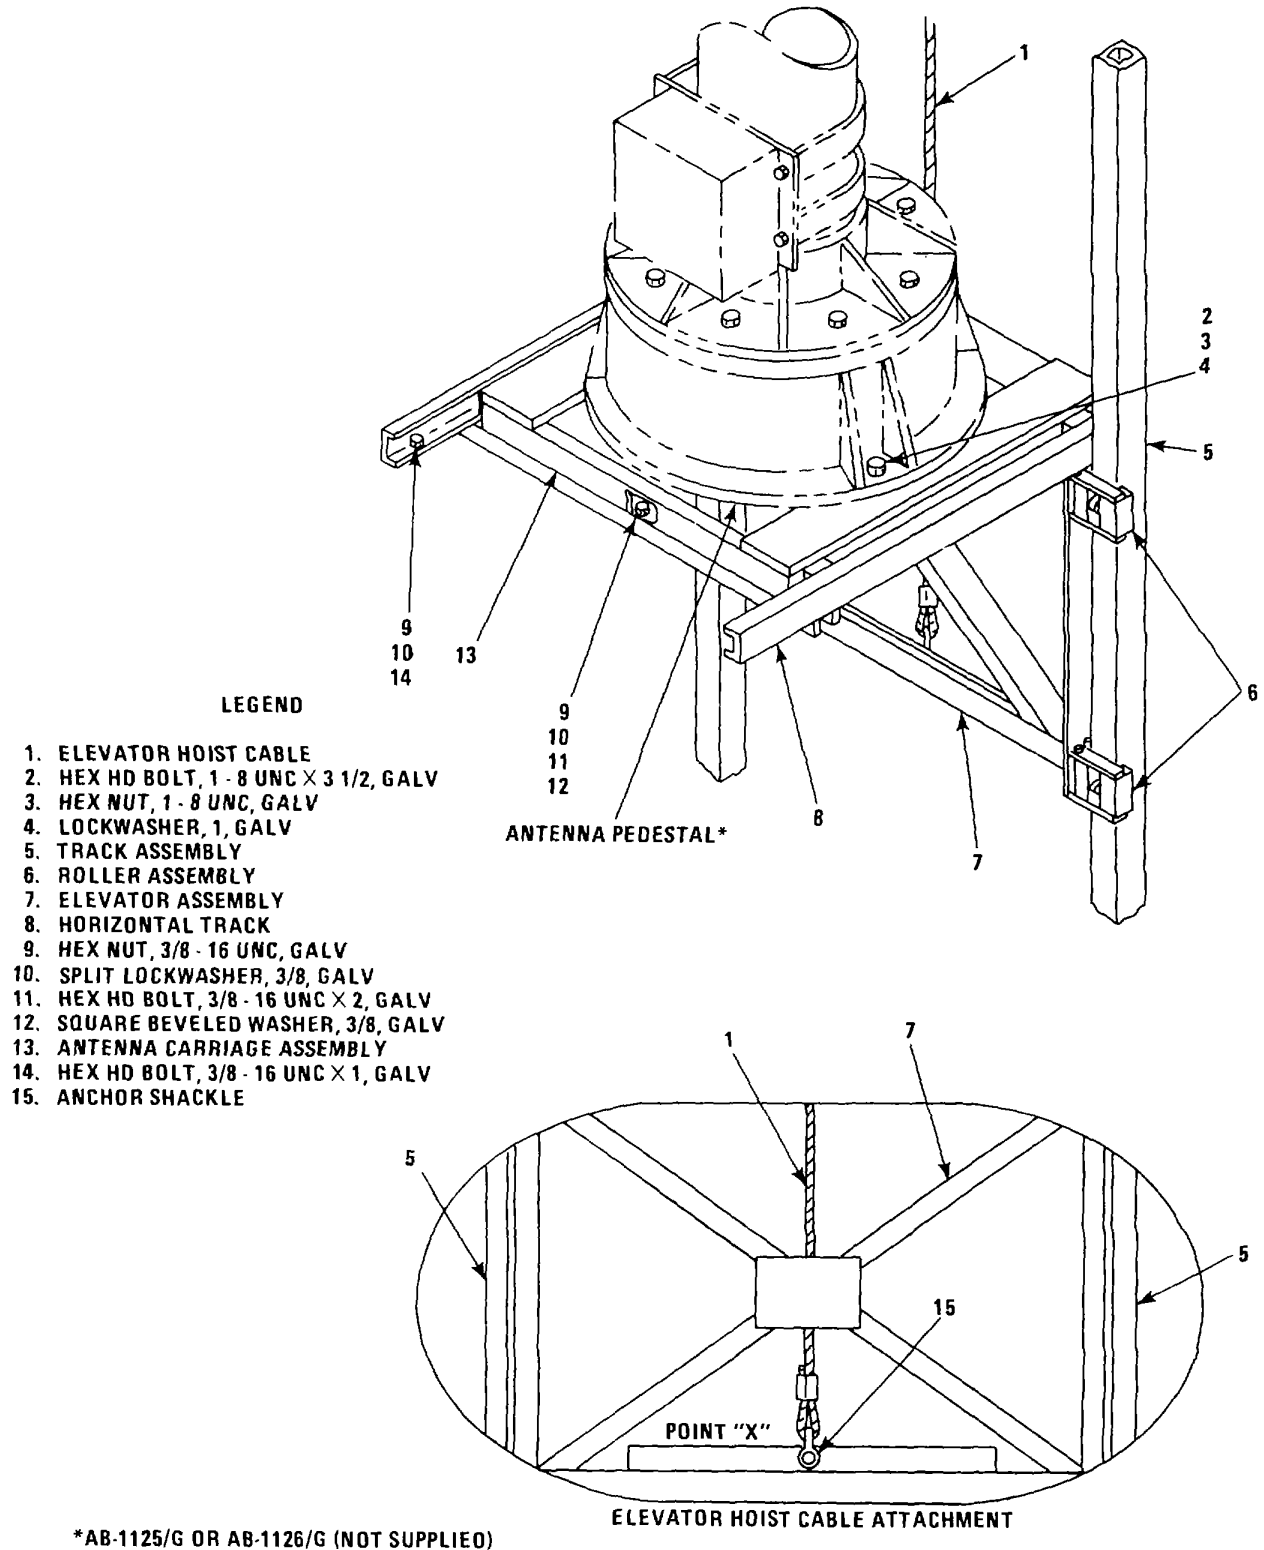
Installation of Elevator Assembly and Antenna Carriage Assembly
